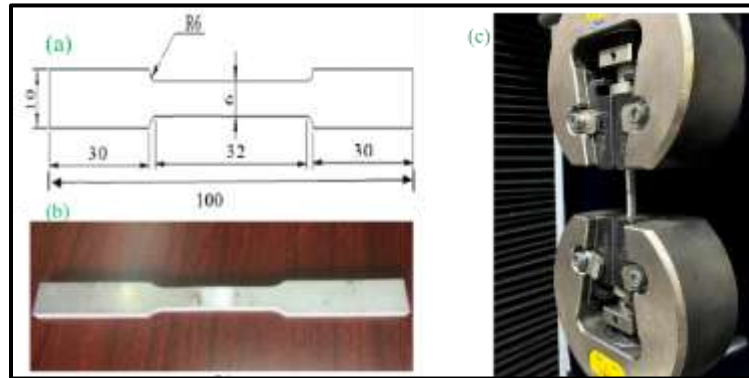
Schematic diagram of the ASTM E8 standard tensile test specimen (a), Photograph of FSWed tensile specimen (b), UTM arrangement(c)
